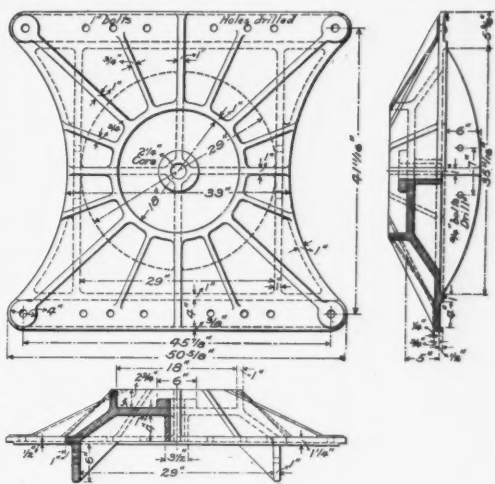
Cast-Steel Center Plate—C., R. I. & P. Locomotive.
